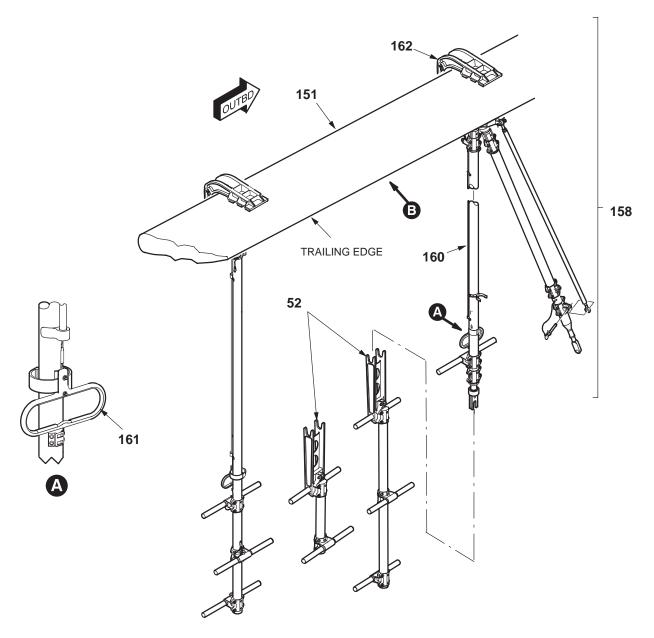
Removal of Securing Pole Assembly from L/H FWD Blade
